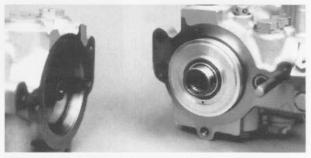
O-Rings Installed Between Sections (Later Production Shown)
